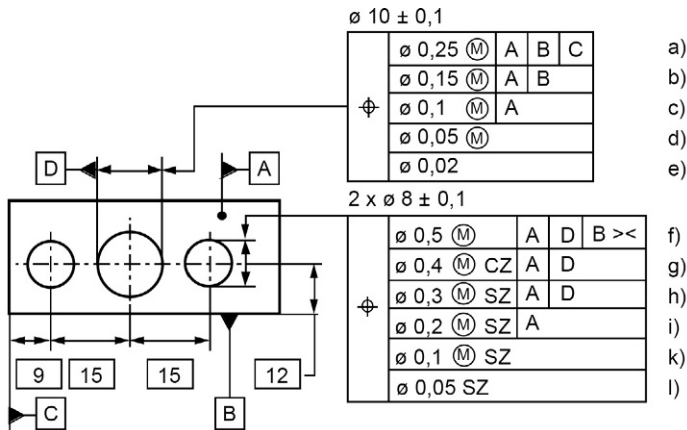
shows the possibilities of tolerancing a pattern (group) of holes. Tolerancing a) is mandatory; without this tolerance, the part is not completely tolerated.
